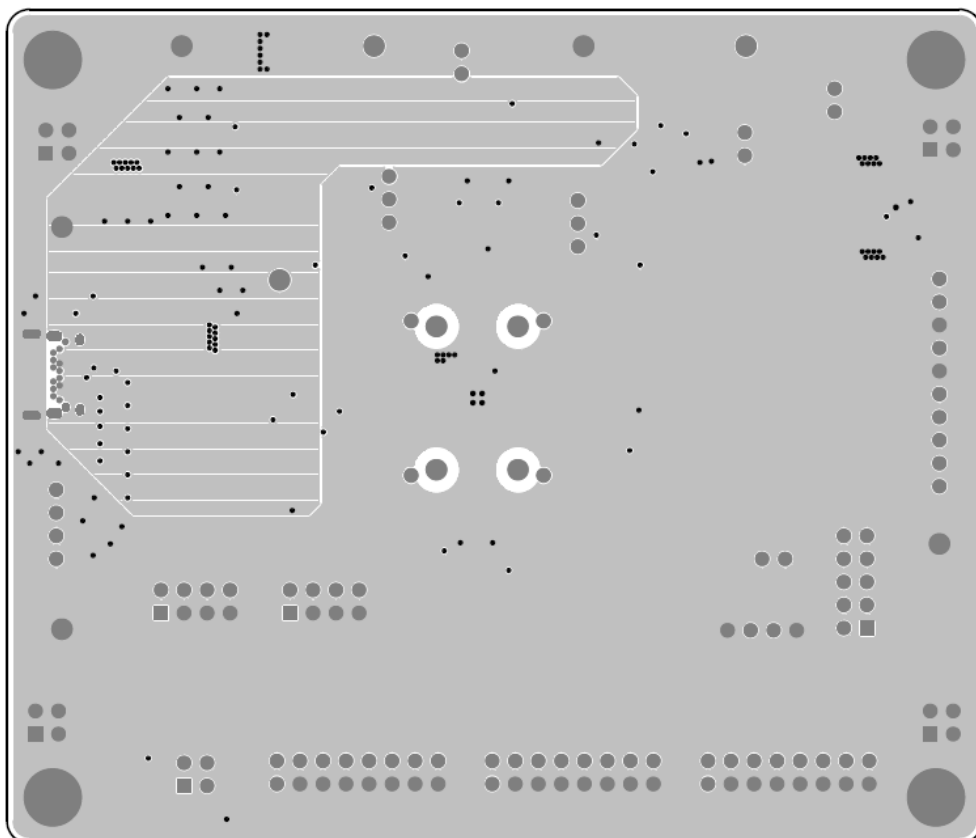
PCB Layout—Inner Side (3<sup>rd</sup> Layer)
